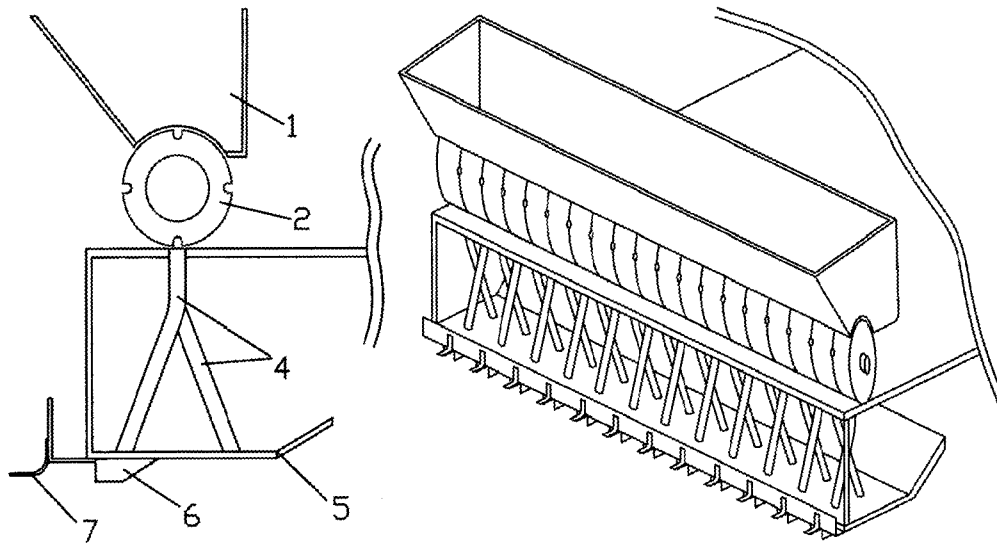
The reciprocating push-rod brush type ginseng seeder.
